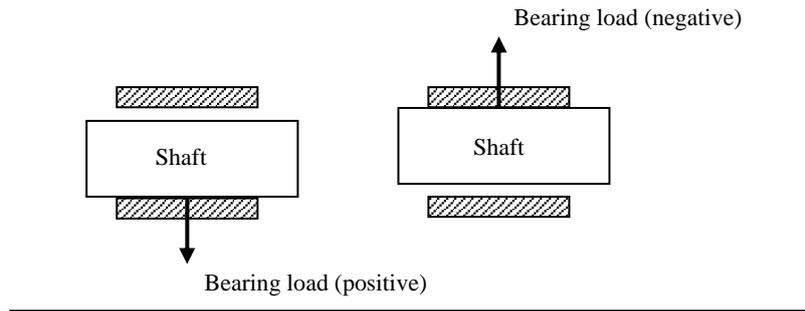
(b) Maximum Bearing Pressure
